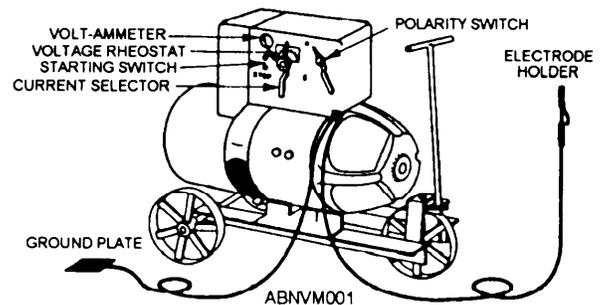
Variable-voltage dc generator welding unit (dual-control type).
